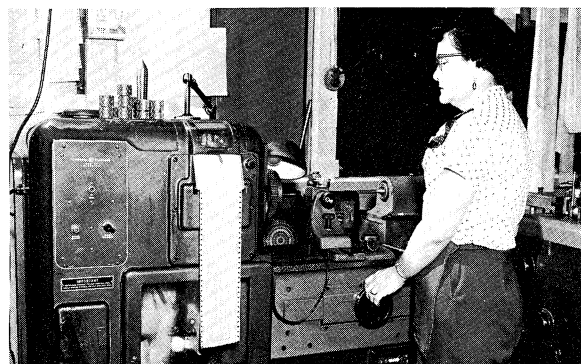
Measuring and charting the lead on a helical gear on a lead checker. *Courtesy Warner Gear Div.
